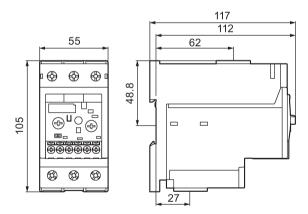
3RB3.3.-..B0 and 3RU2936-3AA01
